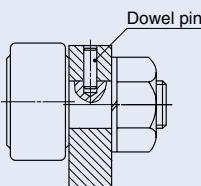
Mounting example of Solid Eccentric Stud Type Cam Follower
